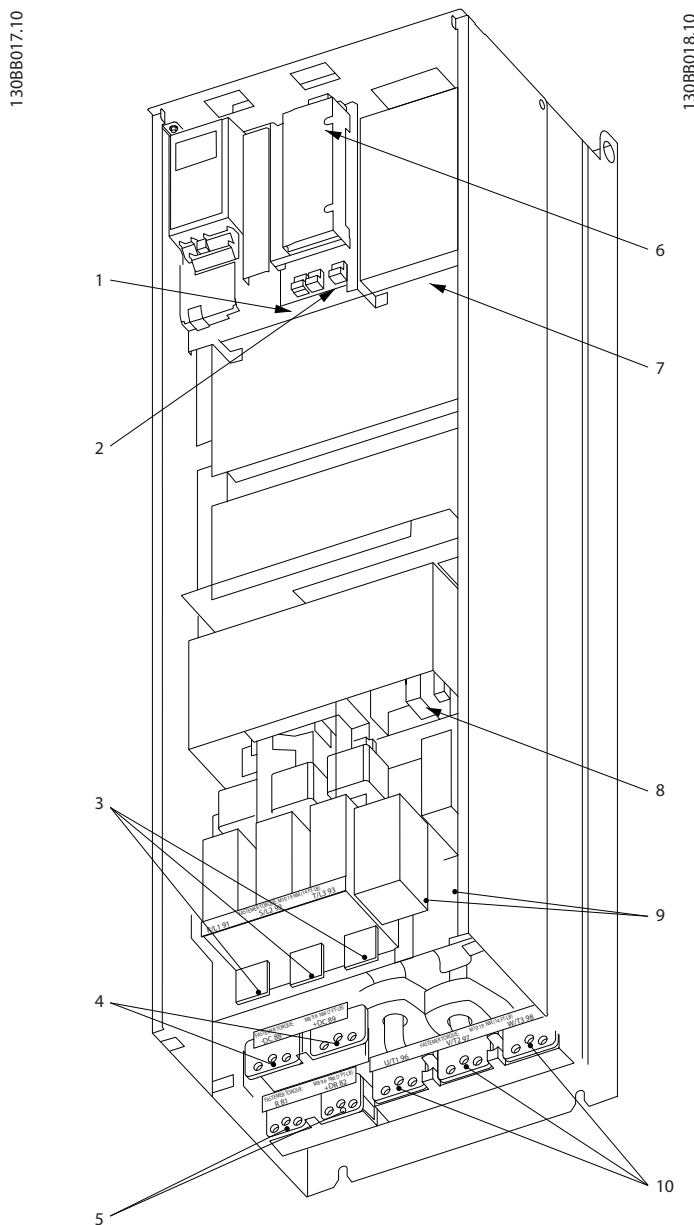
Compact IP00 (Chassis) with Disconnect, Fuse and RFI Filter, Enclosure Type D4
